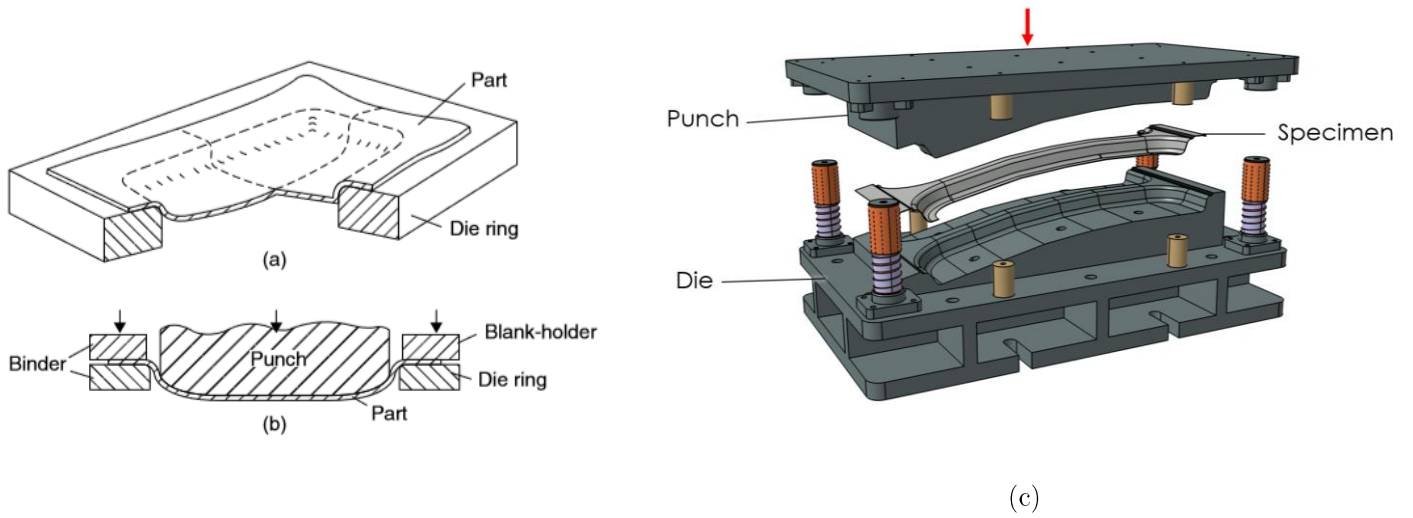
(a) Typical part formed in stamping or draw die showing the die ring, but not the punch or blankholder. [4] (b) Section of tooling in a draw die showing the punch and binder assembly. [4] (c) B-Pillar manufacturing configuration (Designed by S. Spathopoulos)
